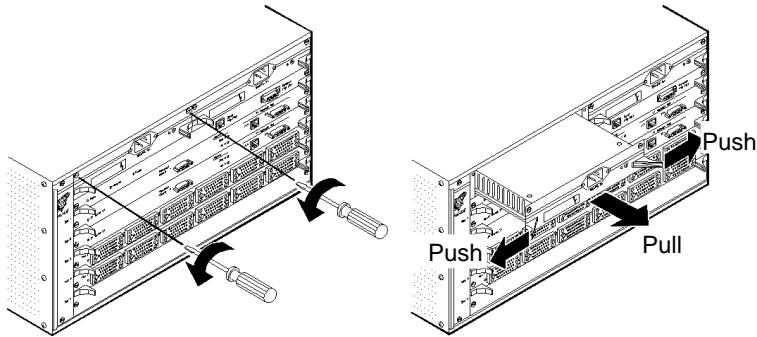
Removal of a 120-240 VAC Power Supply Module
